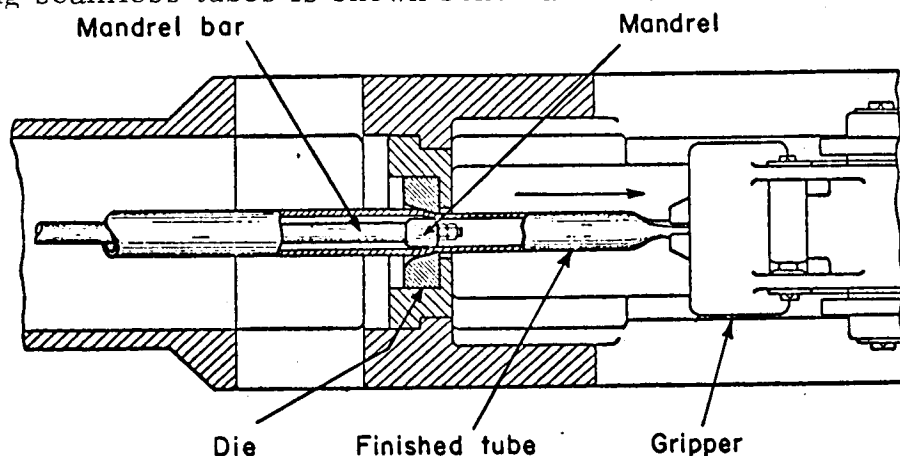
DIAGRAMMATIC VIEW OF DRAWBENCH SHOWING SEAMLESS TUBE IN THE PROCESS OF DRAWING (REF. 17)
